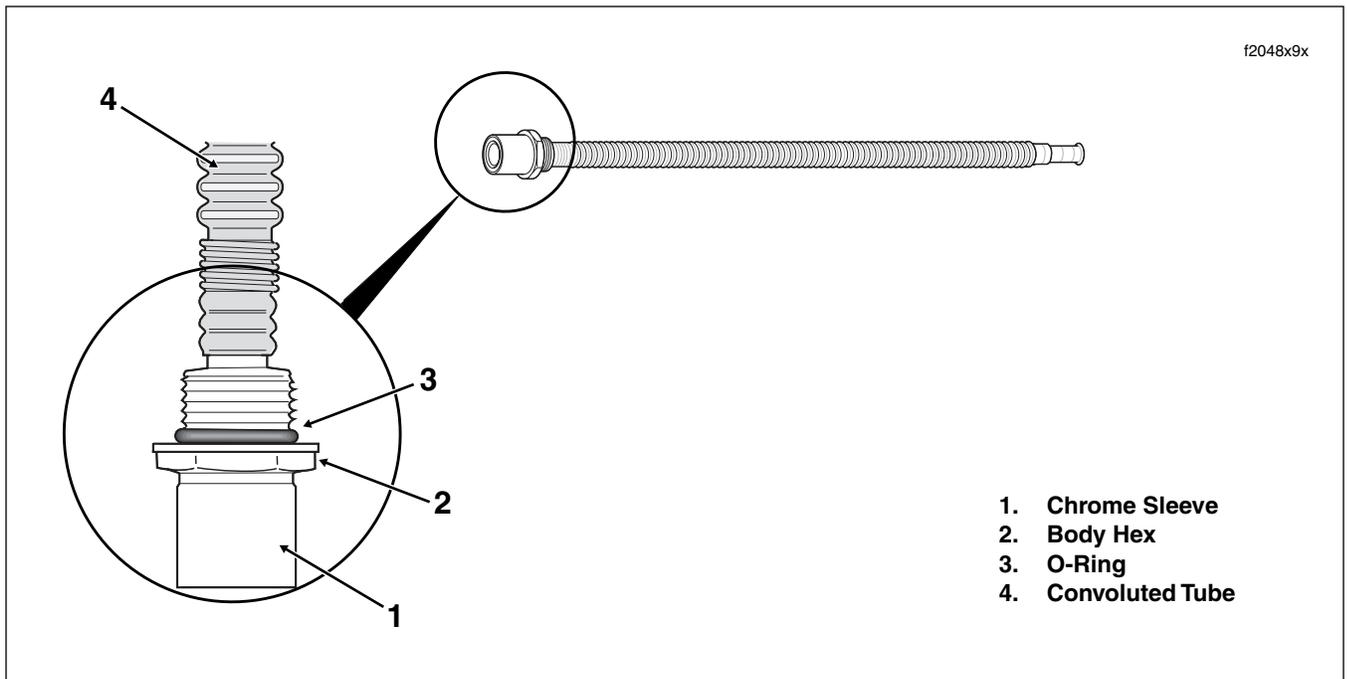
Fuel Supply Check Valve/Tube (Quick-Connect Fitting)
